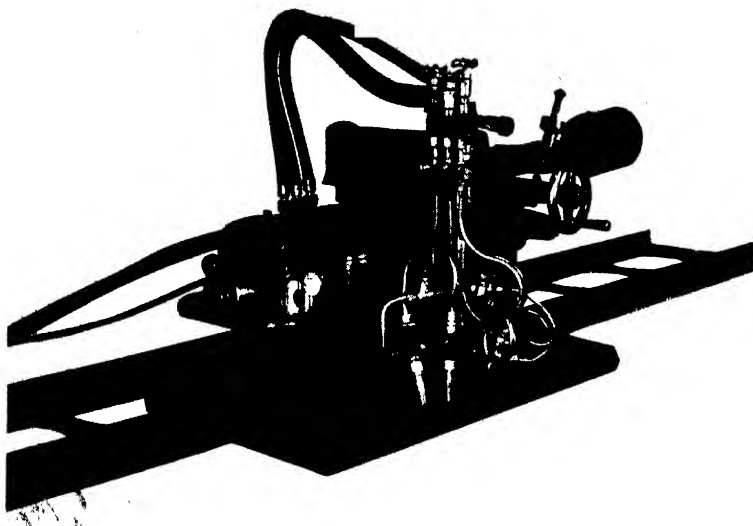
AUTOMATIC CUTTING AND DOUBLE BEVELLING MACHINE
